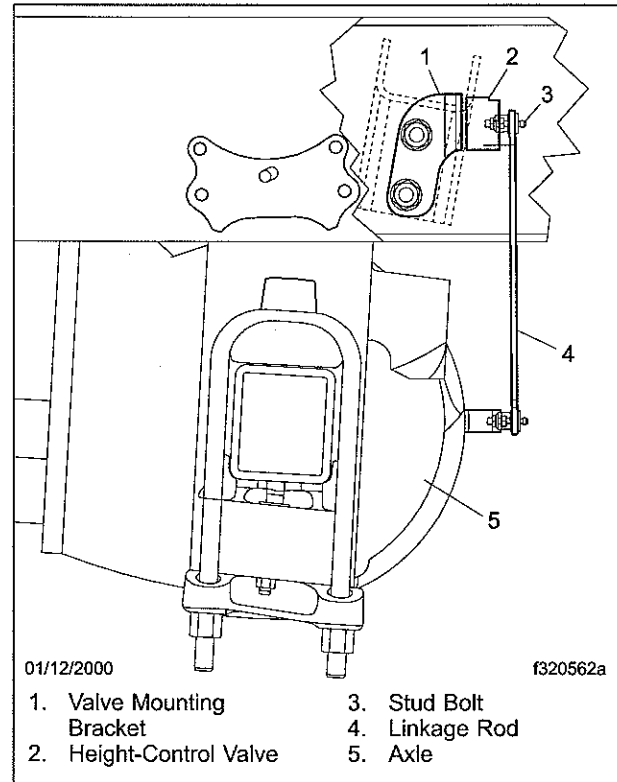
, Barksdale Height-Control Valve Installation (side view)
